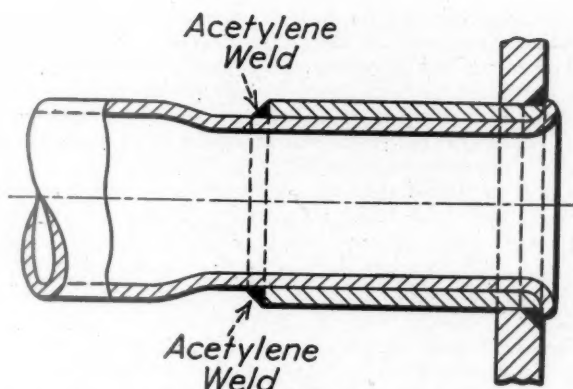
Flues and sleeves rolled tight in back tube sheet, sleeves welded complete and bead applied to flues
